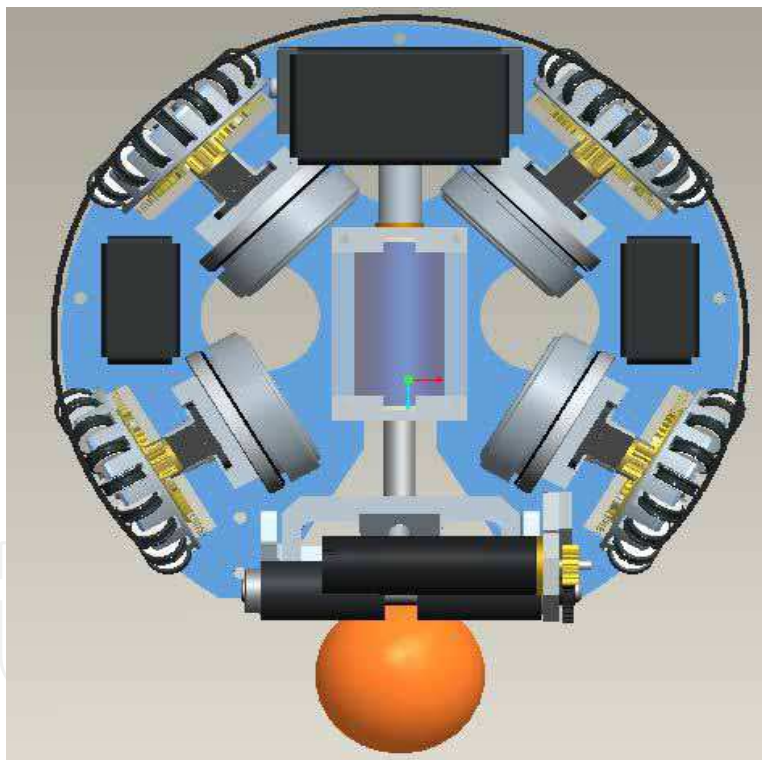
The 3D assembly drawing of the small size robot chassis with brushless motors
